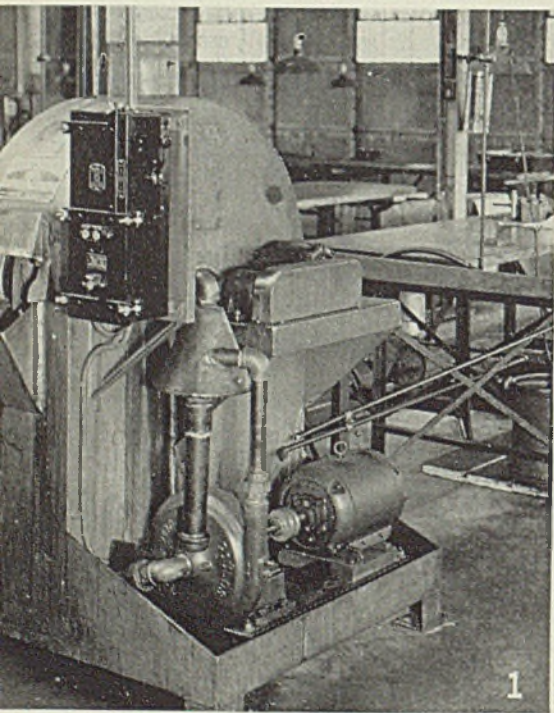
shows a ferris-wheel type cleaning machine at Wagner Electric Corp., St. Louis, where a number of these machines clean hydraulic brake cylinders and parts between machining operations. The operator of one machine tool places the work in a carrier leading to the small ferris wheel in the machine. After being cleaned, the work is discharged onto the feeding table of the next succeeding machine tool. Machining of these brake cylinders is exceptionally precise work. It was found that cleaning between
